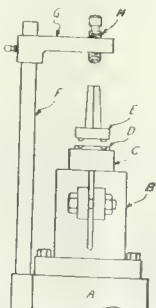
JIG FOR SCREWING IN STEEL BASE PLATES.
